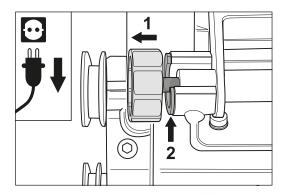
Turn the two motor nuts out so far (1) until the two nuts used to fit into the motor bearing bracket are exposed (2).
